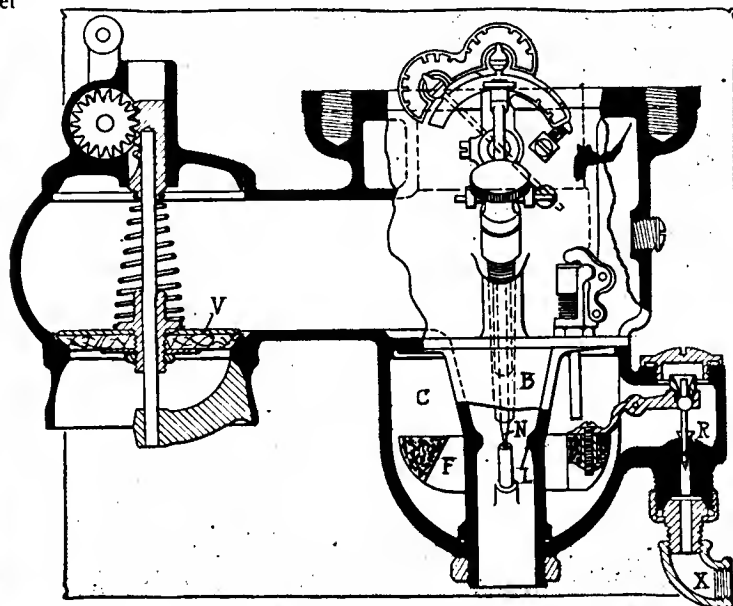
Schebler L has concentric float and spring auxiliary valve
